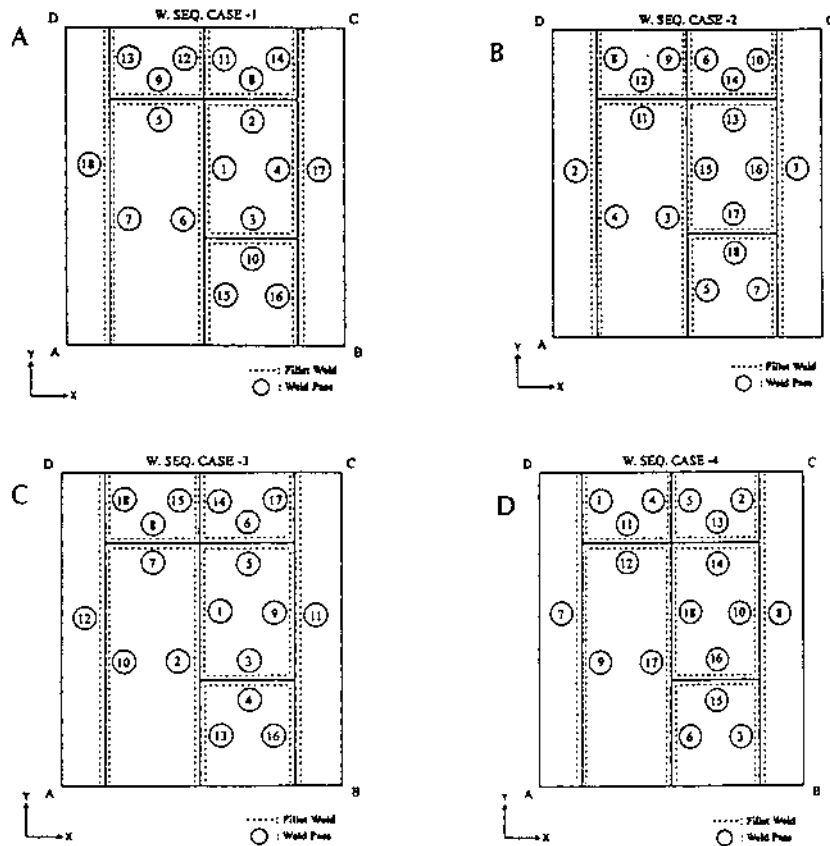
Welding sequences for angular distortion of aluminum panel structure. (A) Welding sequence 1, (B) welding sequence 2, (C) welding sequence 3, and (D) welding sequence 4.
